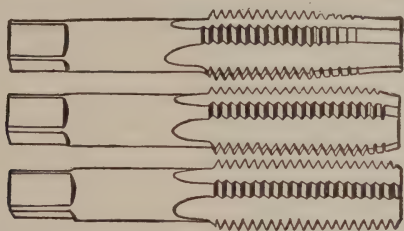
Set of hand taps, taper, plug, and bottoming.
